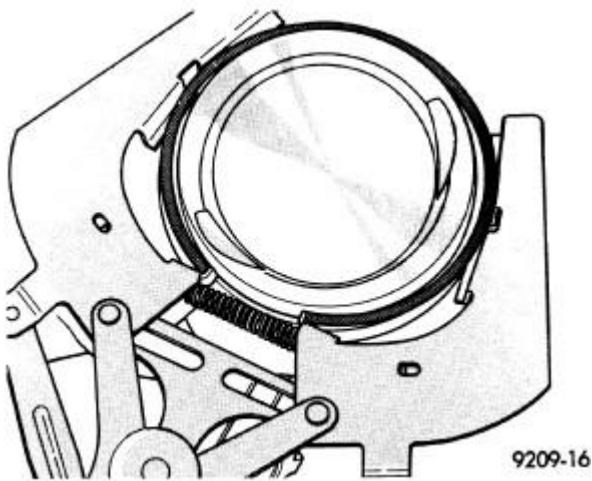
PISTON RINGS - REMOVAL/INSTALLATION
